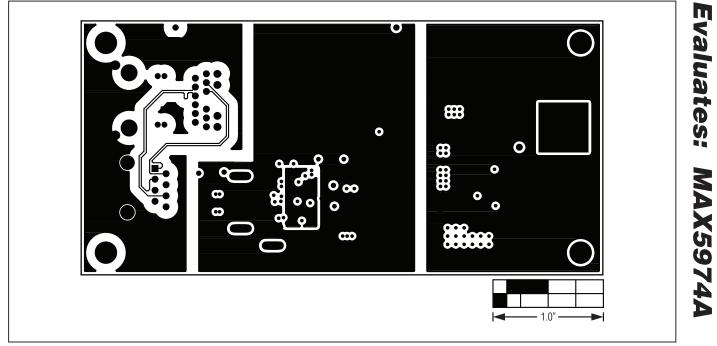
MAX5974A EV Kit PCB Layout—GND Layer 2
